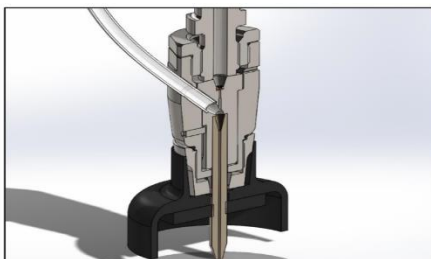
Cutaway view of cutting head consisting of sapphire/diamond orifice abrasive cut and nozzle [7]
